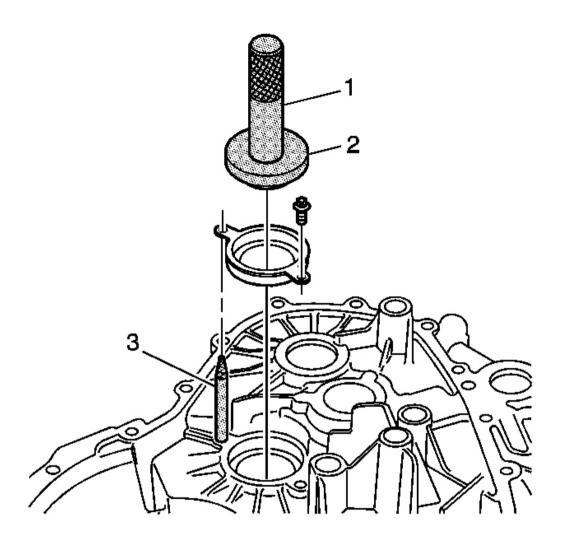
Installing Output Shaft Bearing Race Courtesy of GENERAL MOTORS CORP.
